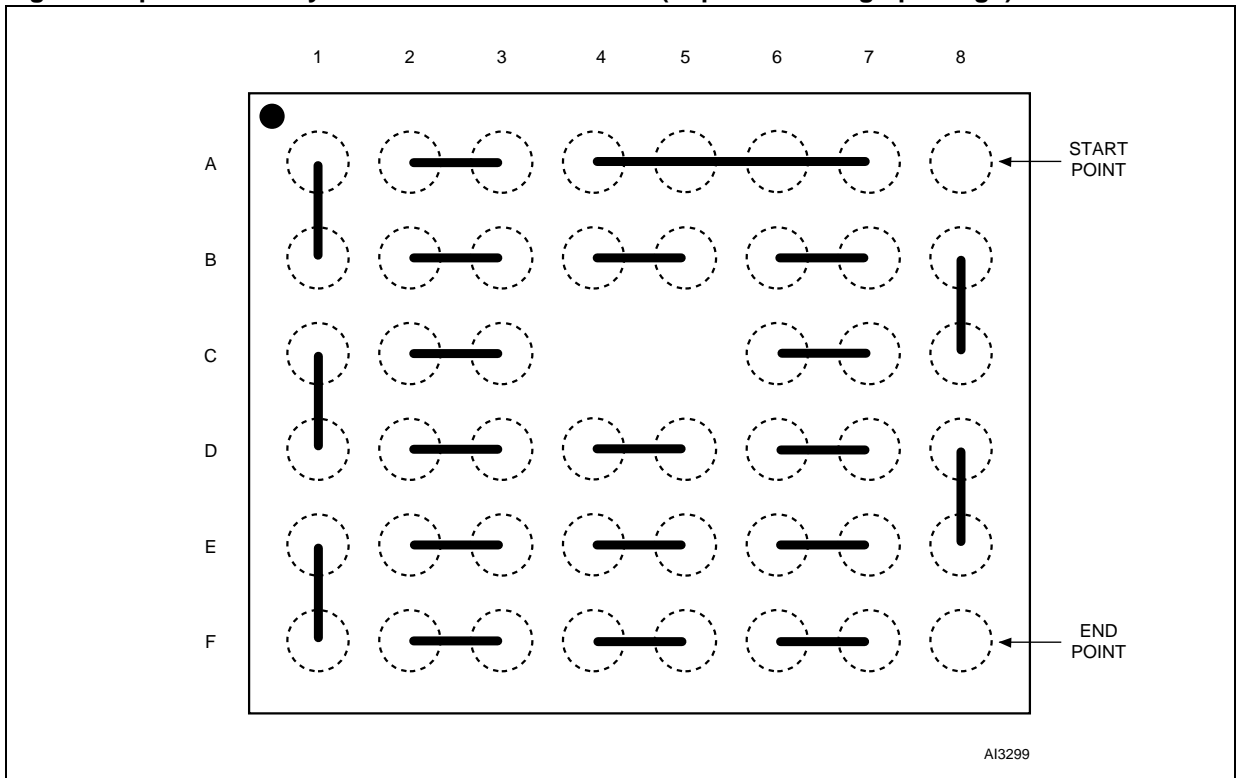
μ BGA46 Daisy Chain - PCB Connections (Top view through package)
